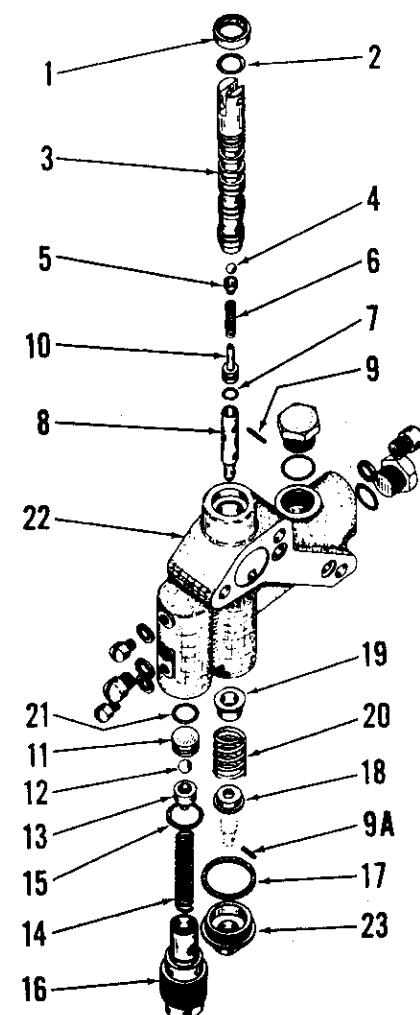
Exploded view of the double acting auxiliary control valve used on Series 354, 364, 384, 424, 444, 2424, 2444 and late Series B-414 tractors.
